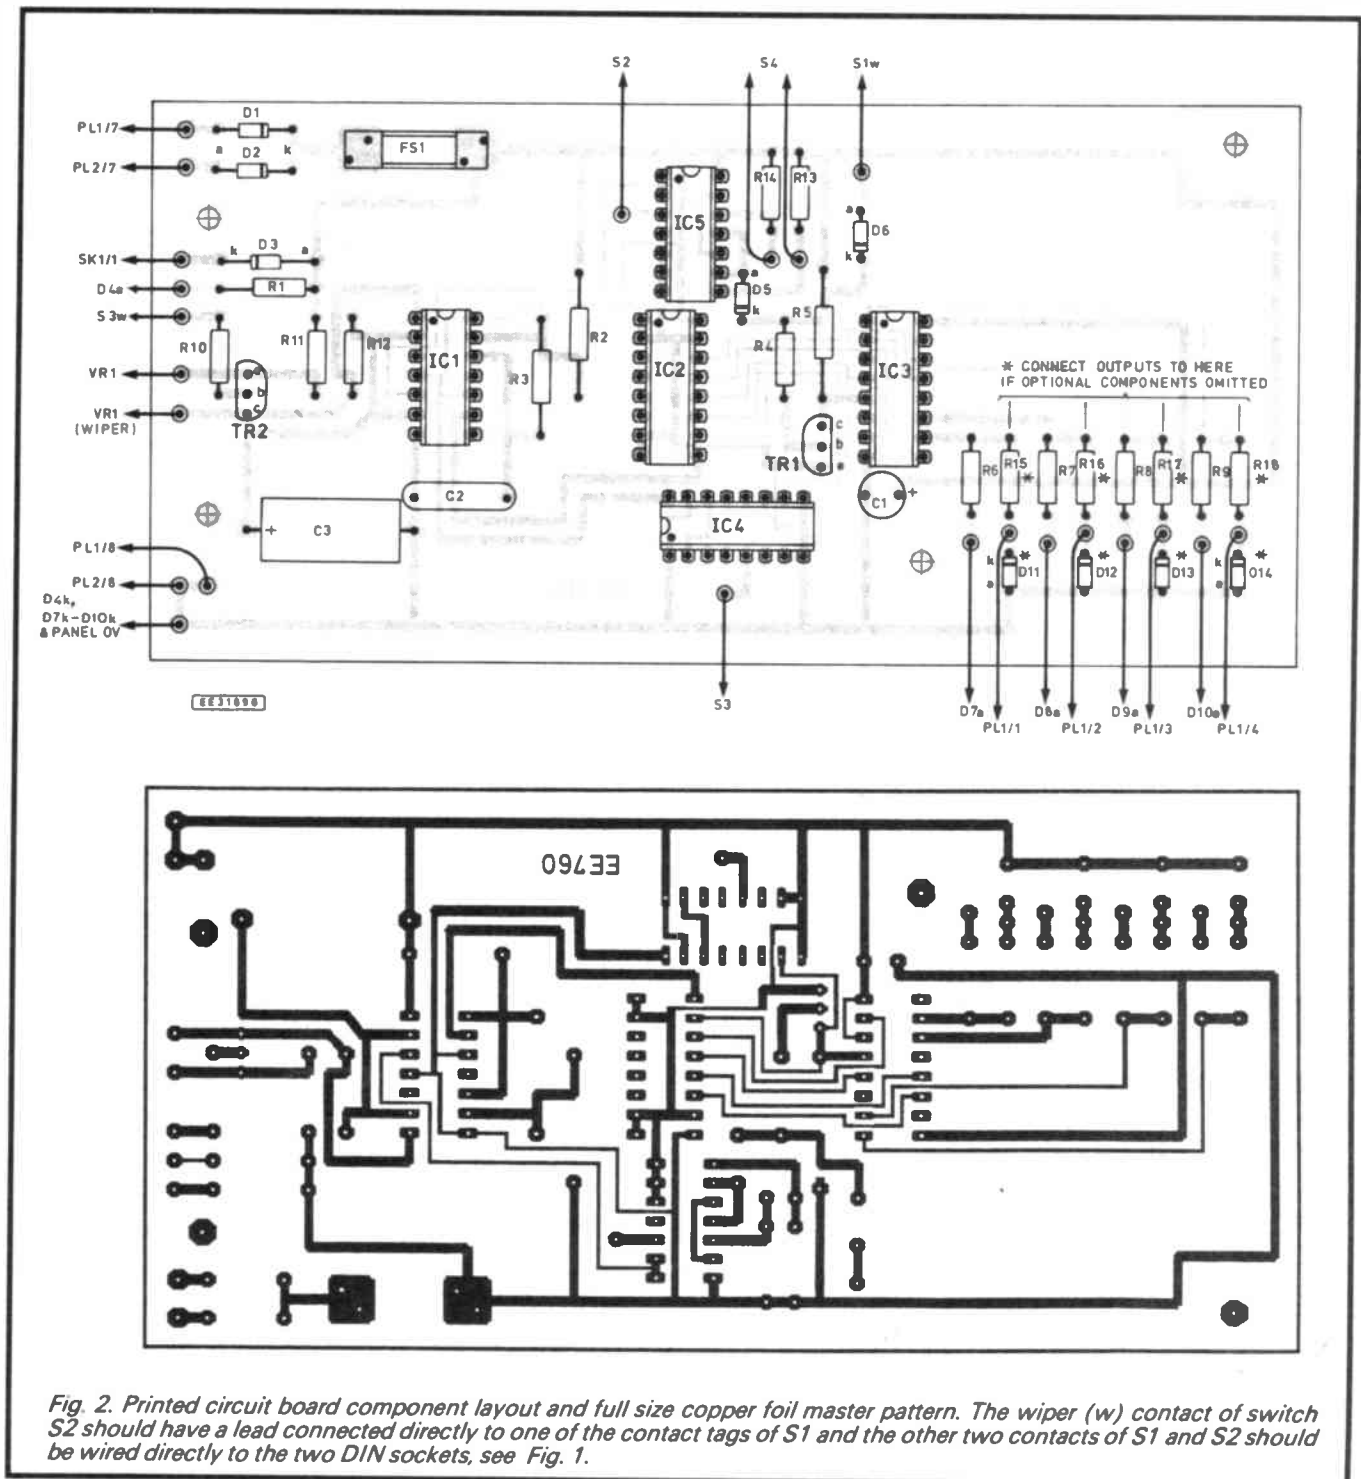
Printed circuit board component layout and full size copper foil master pattern. The wiper (w) contact of switch S2 should have a lead connected directly to one of the contact tags of S1 and the other two contacts of S1 and S2 should be wired directly to the two DIN sockets, see Fig. 1.
